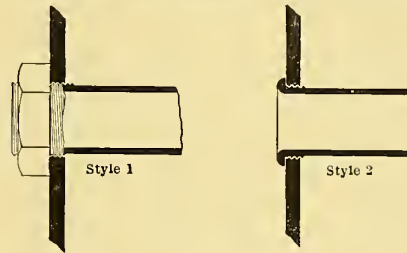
TWO METHODS OF FASTENING STAY-TUBES.
